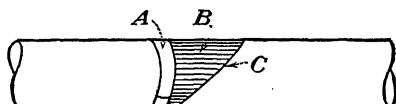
A, base of pattern; B, pattern; C, line to be cut.
